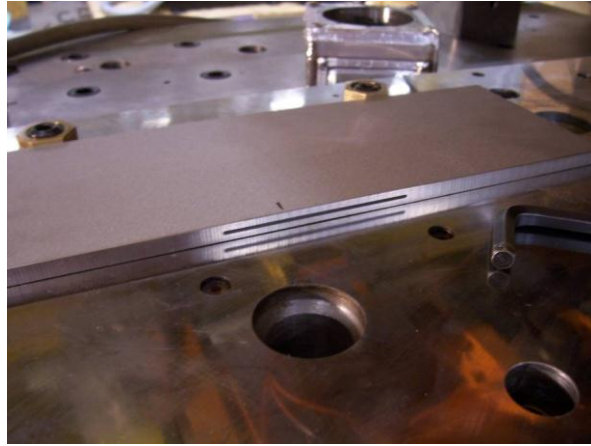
W-Re tracer powder placed in the tool path of butt weld in Ti-6Al-4V plate [Edwards, 2010a].
